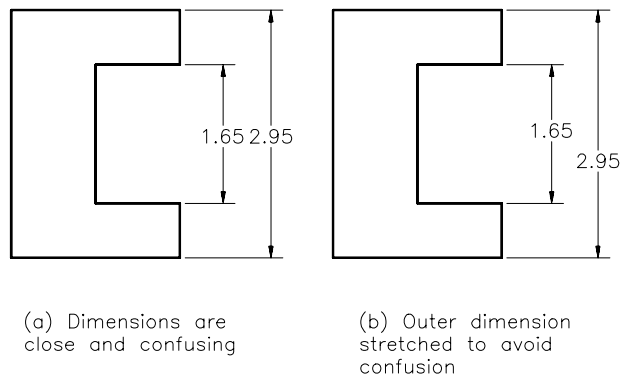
Drawing for Exercise 1, stretching dimensions
